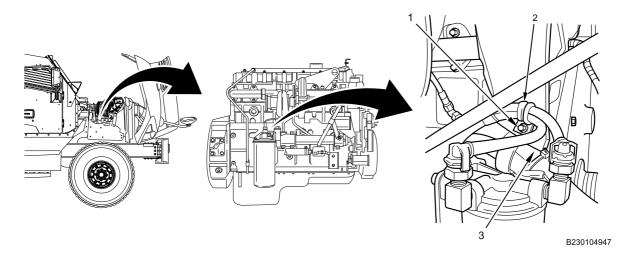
Fuel/Water Separator Hose Bracket Mounting Bolt.
